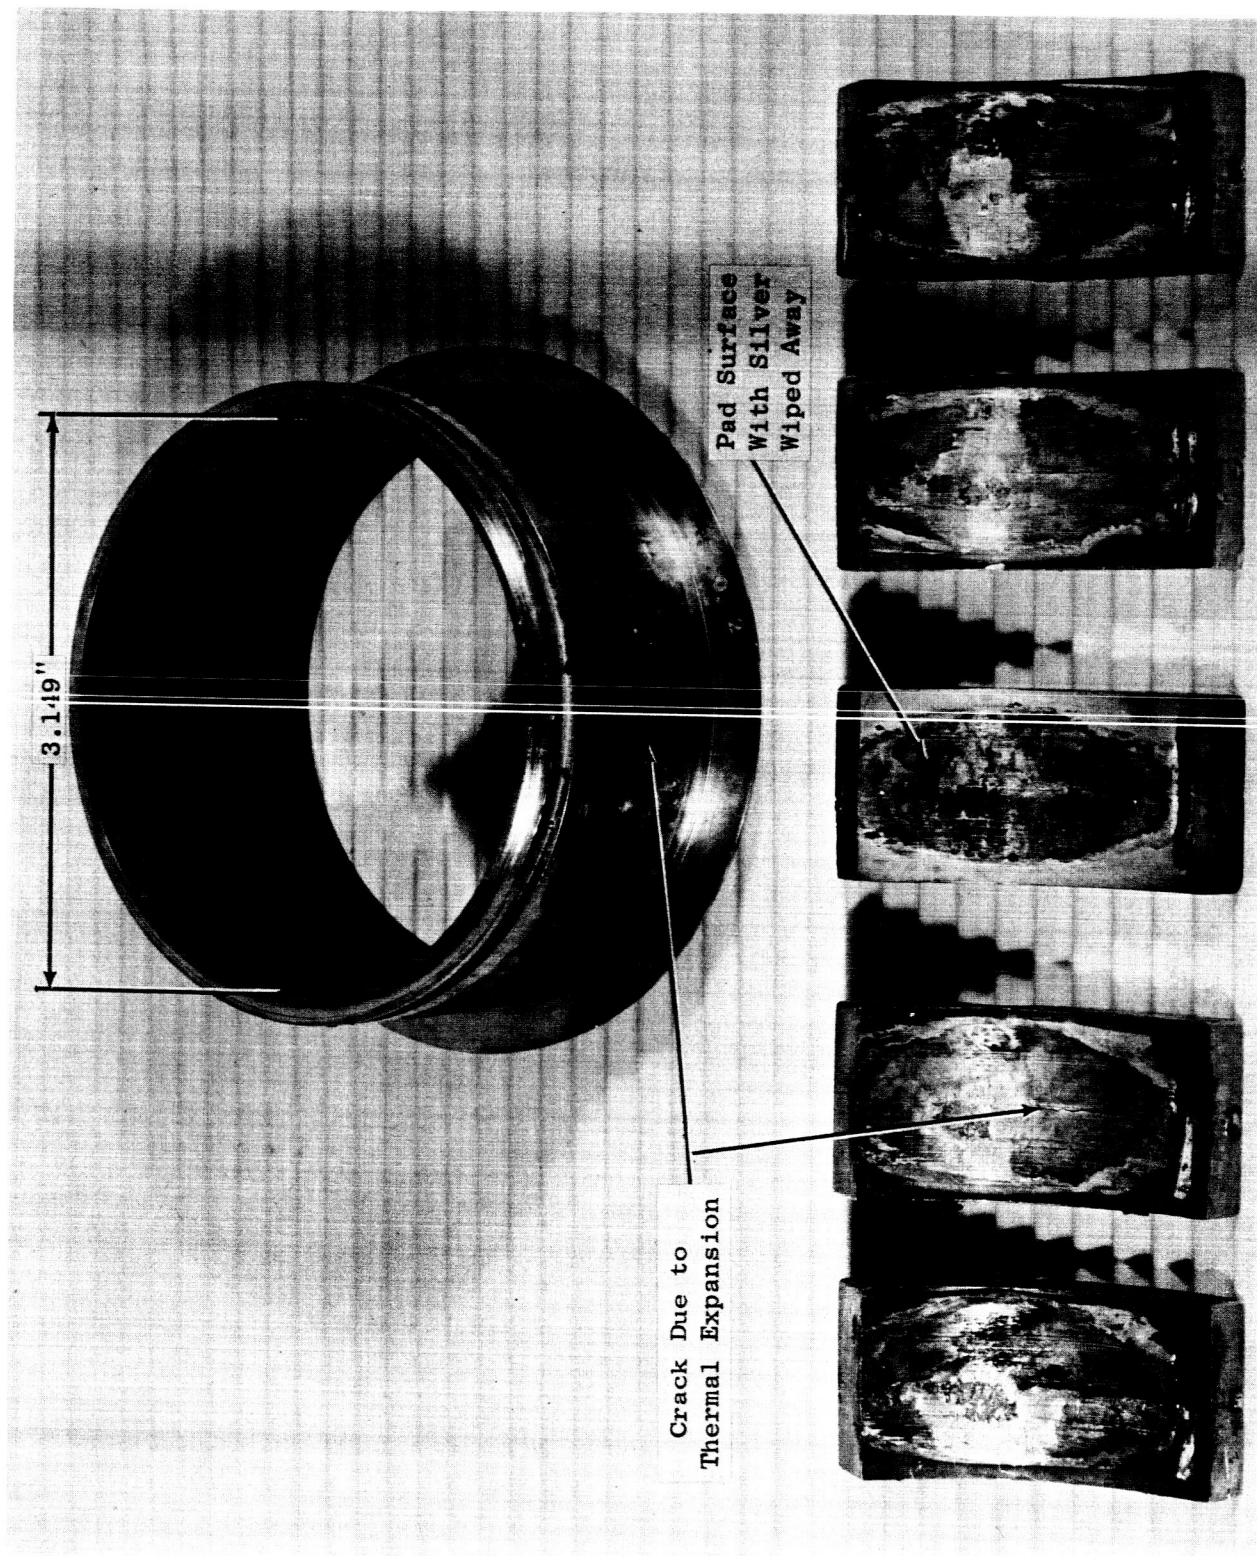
Pivoted Pad Bearing Damage Resulting From Loss of Lubricant Oil.
